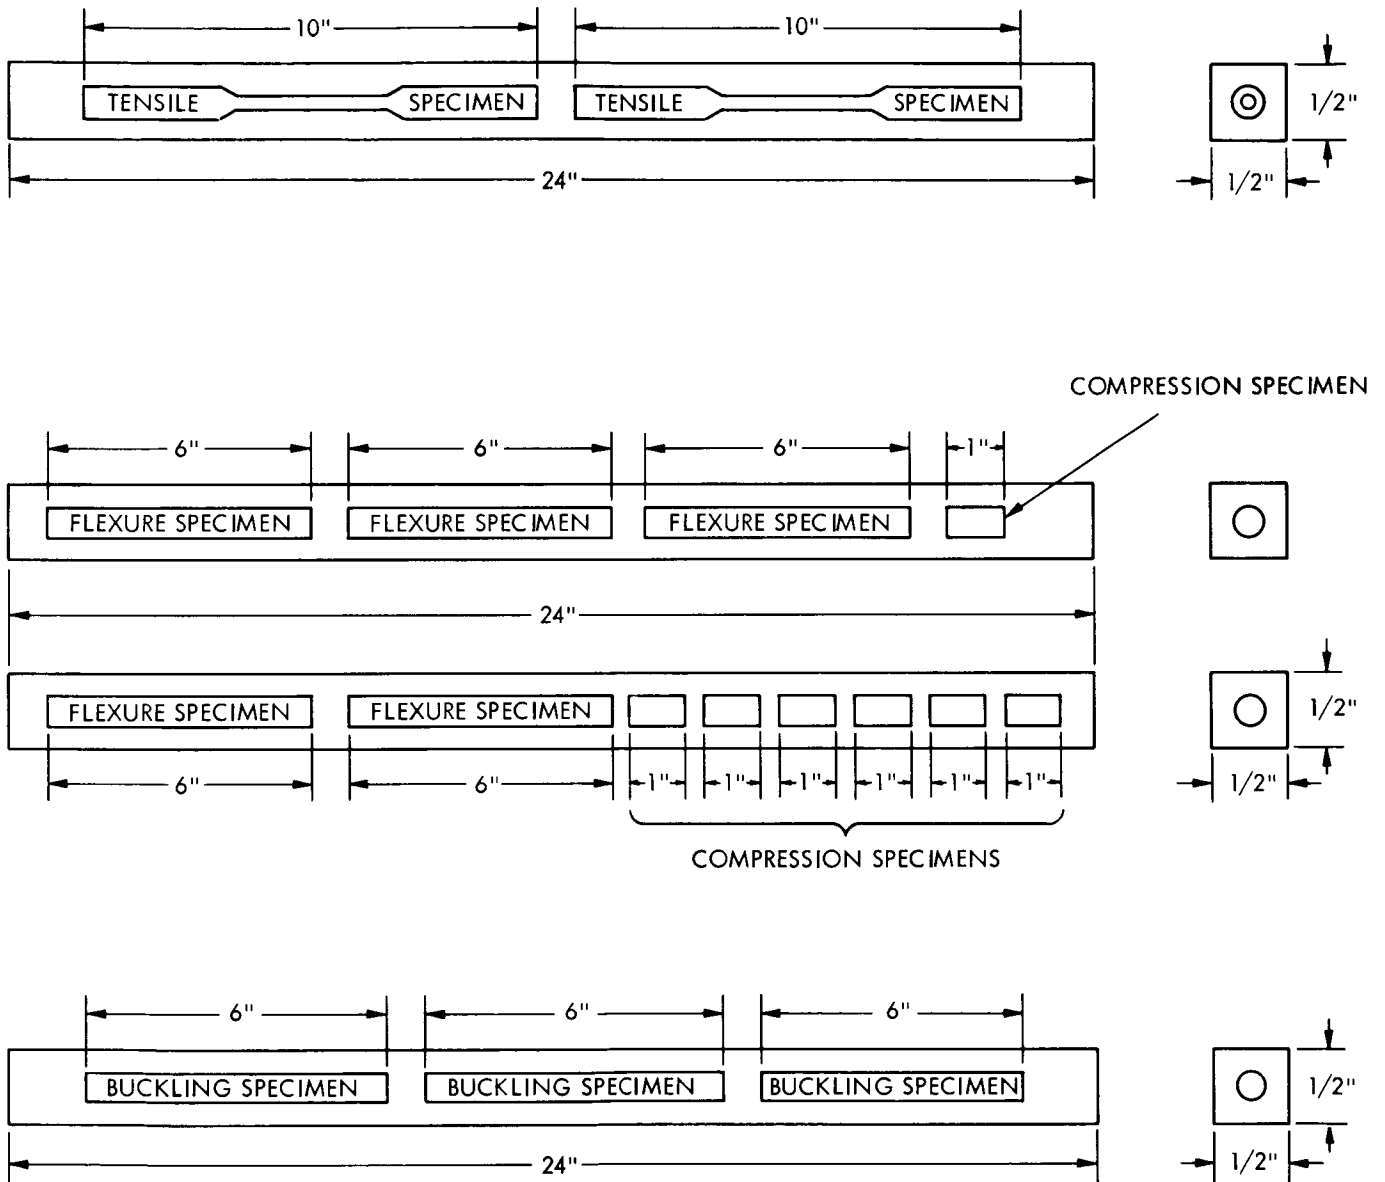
Layout Diagrams of Laminate Stock for Machined Rod Specimens
